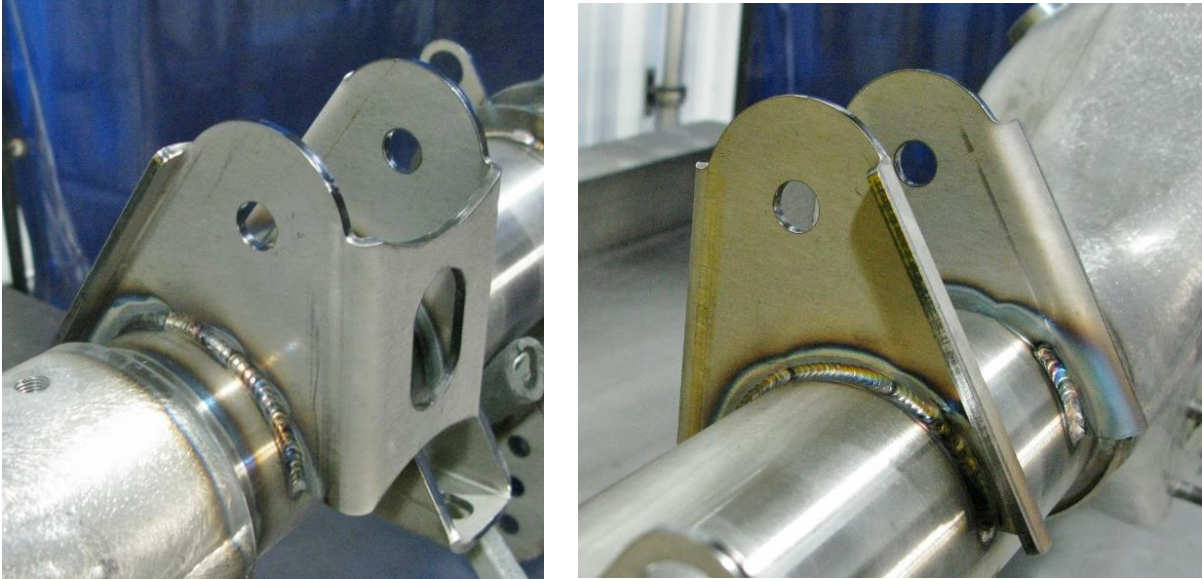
Finish Weld Upper Link Axle Brackets
